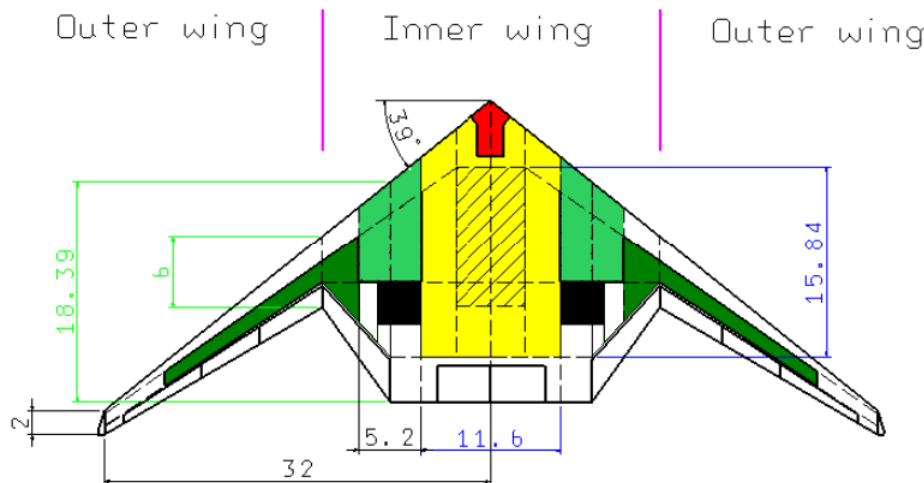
Product Definition of Inner Wing and Outer Wing [45]
